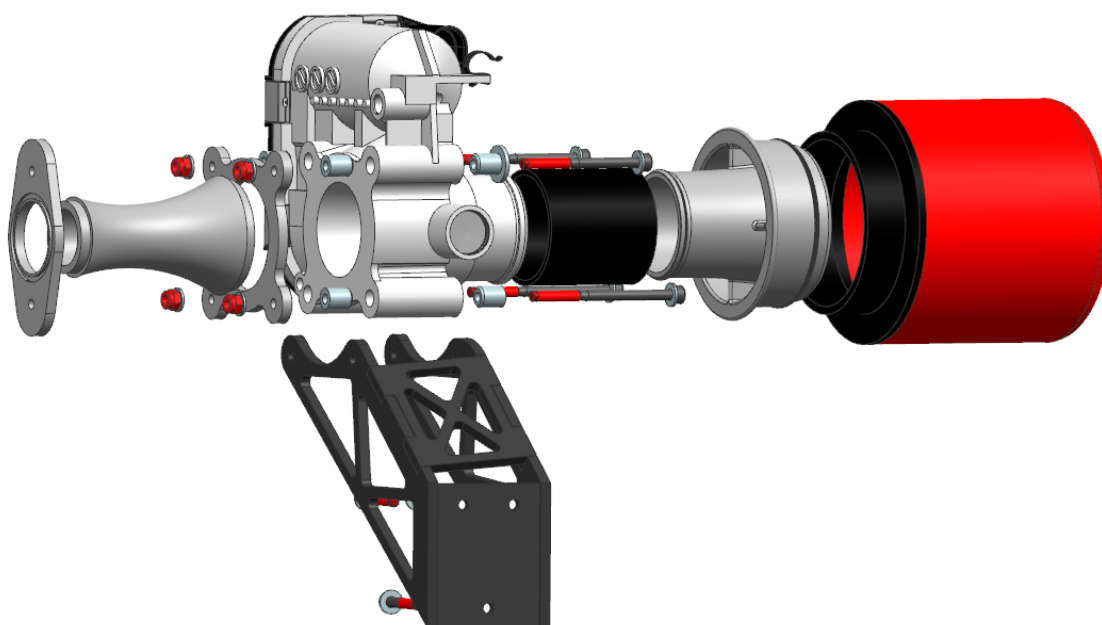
Exploded assembly of non-printed parts. Note the trussed ETB mount
